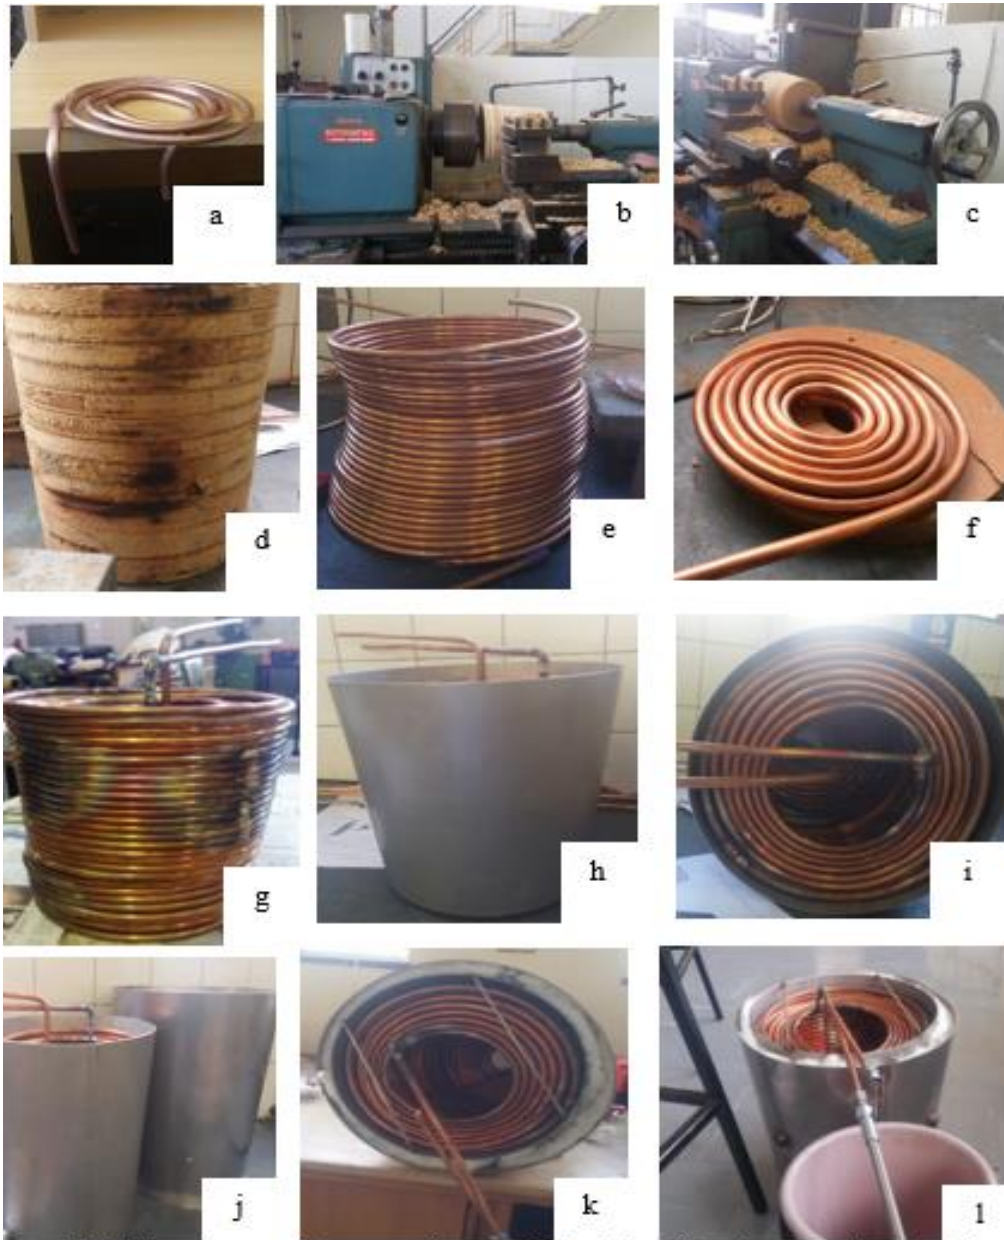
Receiver fabricaingg procedure, undesired hand bend a, template on lathe machining on b, c, template d, frustum shape body e, spiral front to prevent forced convention f, complete receiver coil set up g, coil in stainless container h, i, second stainless to hold the insulator j, complete receiver with insulator k, test for leakage l
